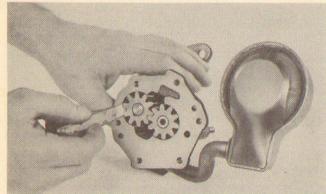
Checking Clearance Between Gears and Oil Pump Body
